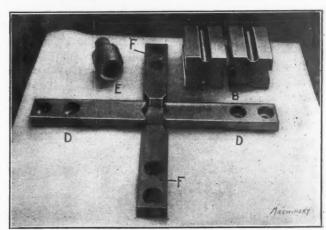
Type of Dies, Hammers and Heading Tool used in the Hammer Type of Bolt Header shown in Fig. 19
